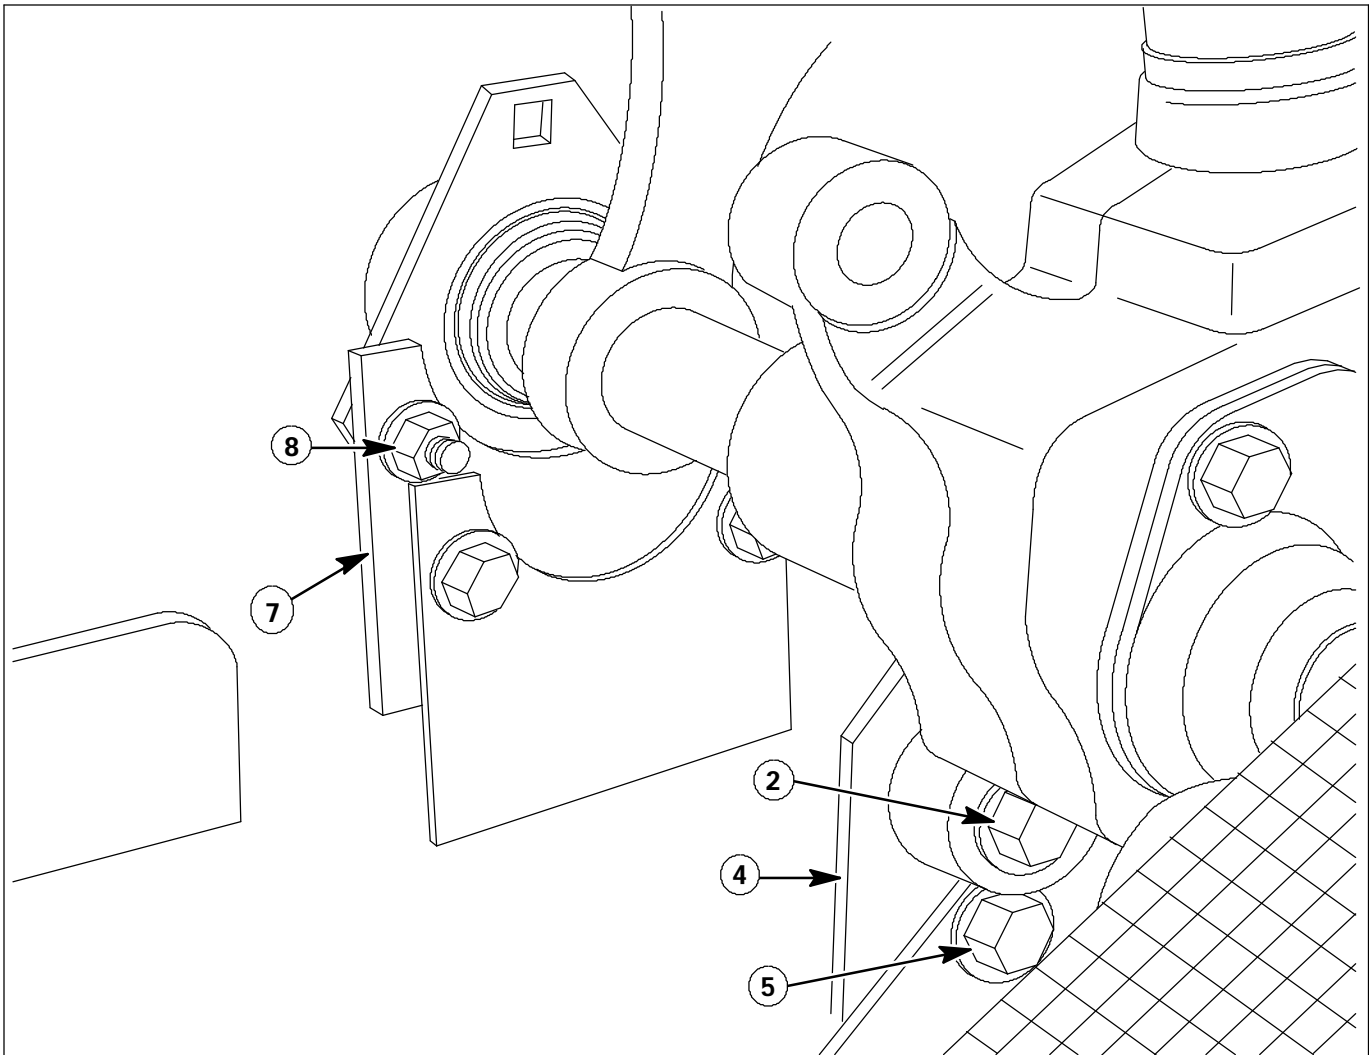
Mounting New Bearing and Steering Gear Support Brackets
